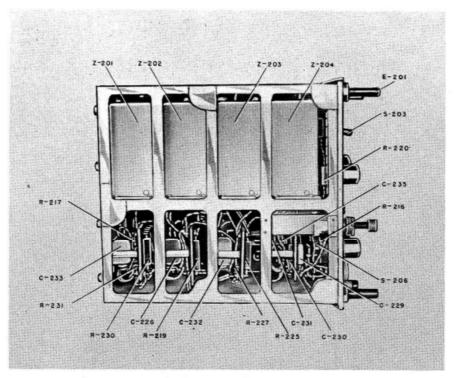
Receiver Unit — Left End Open View (older model shown; see note for Fig. 1)
